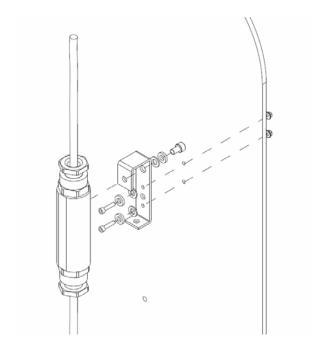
FXT-DI mounting arrangement – EXHEAT Industrial Ltd
